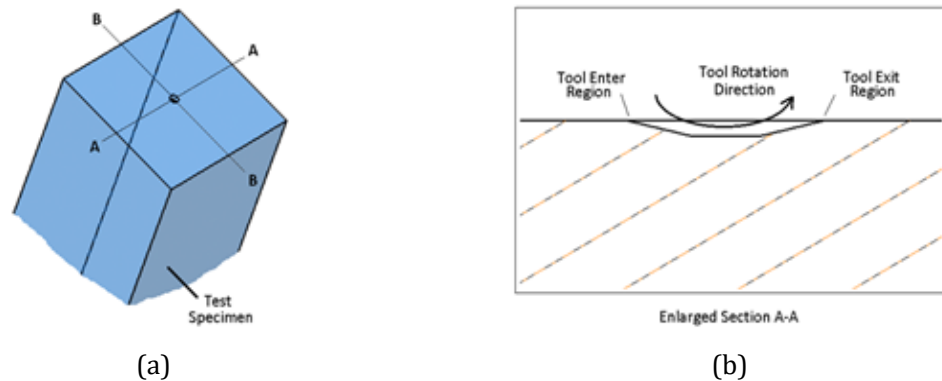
Burr formation tendency at the edge of the dimple profile/ exit region during cutting operation (a) Isometric view of workpiece, (b) Cross-section view of machined dimple profile.
